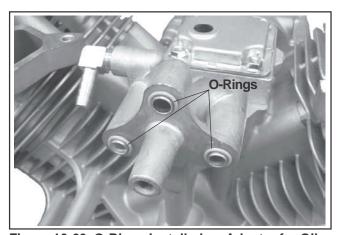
O-Rings Installed on Adapter for Oil Filter Housing.
